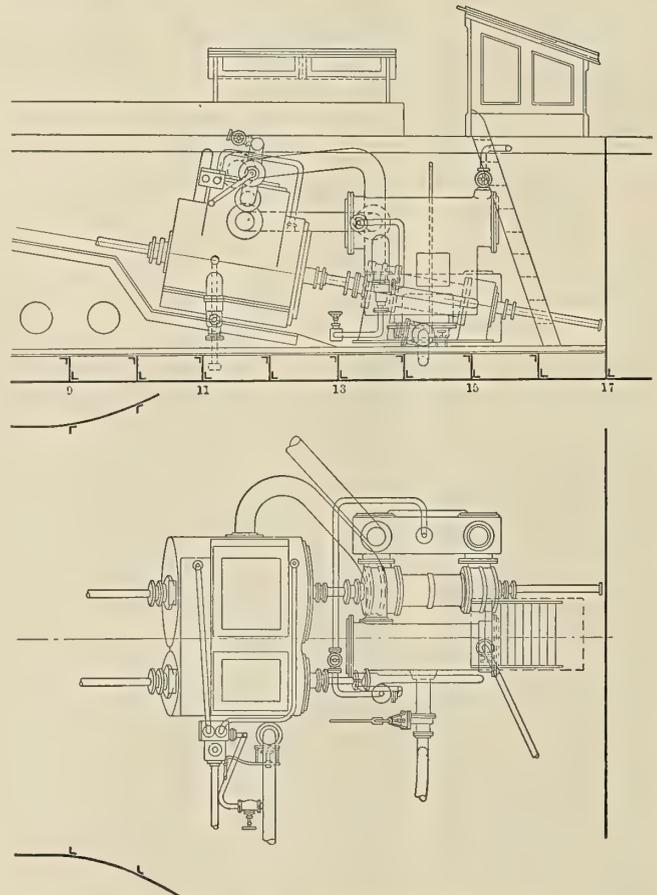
ELEVATION AND PLAN OF ENGINE ROOM
